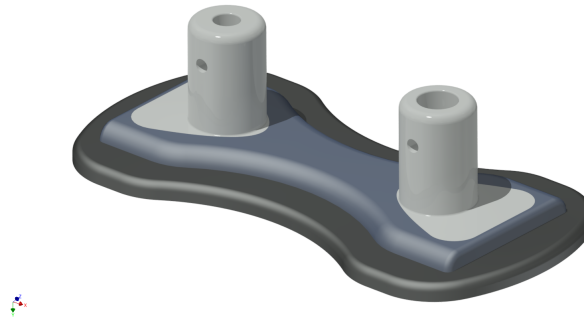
3D CAD of the second version of the single channel optode holder.
